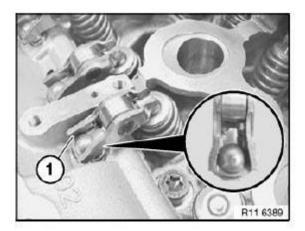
Identifying Sure Roller Cam Follower Courtesy of BMW OF NORTH AMERICA, INC.
